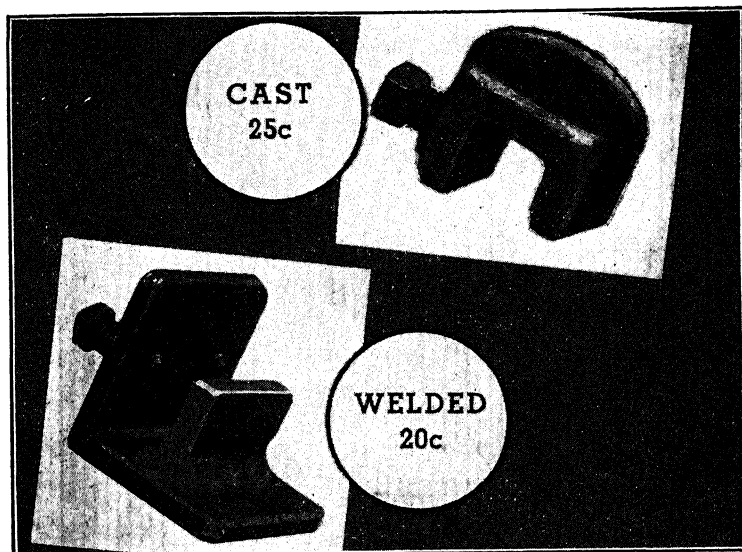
This degree gauge for a bar bending machine formerly required separate patterns for every size machine. It cost 25c. The welded design, costing 20c, can be made to suit any size machine without additional cost or production delay.
